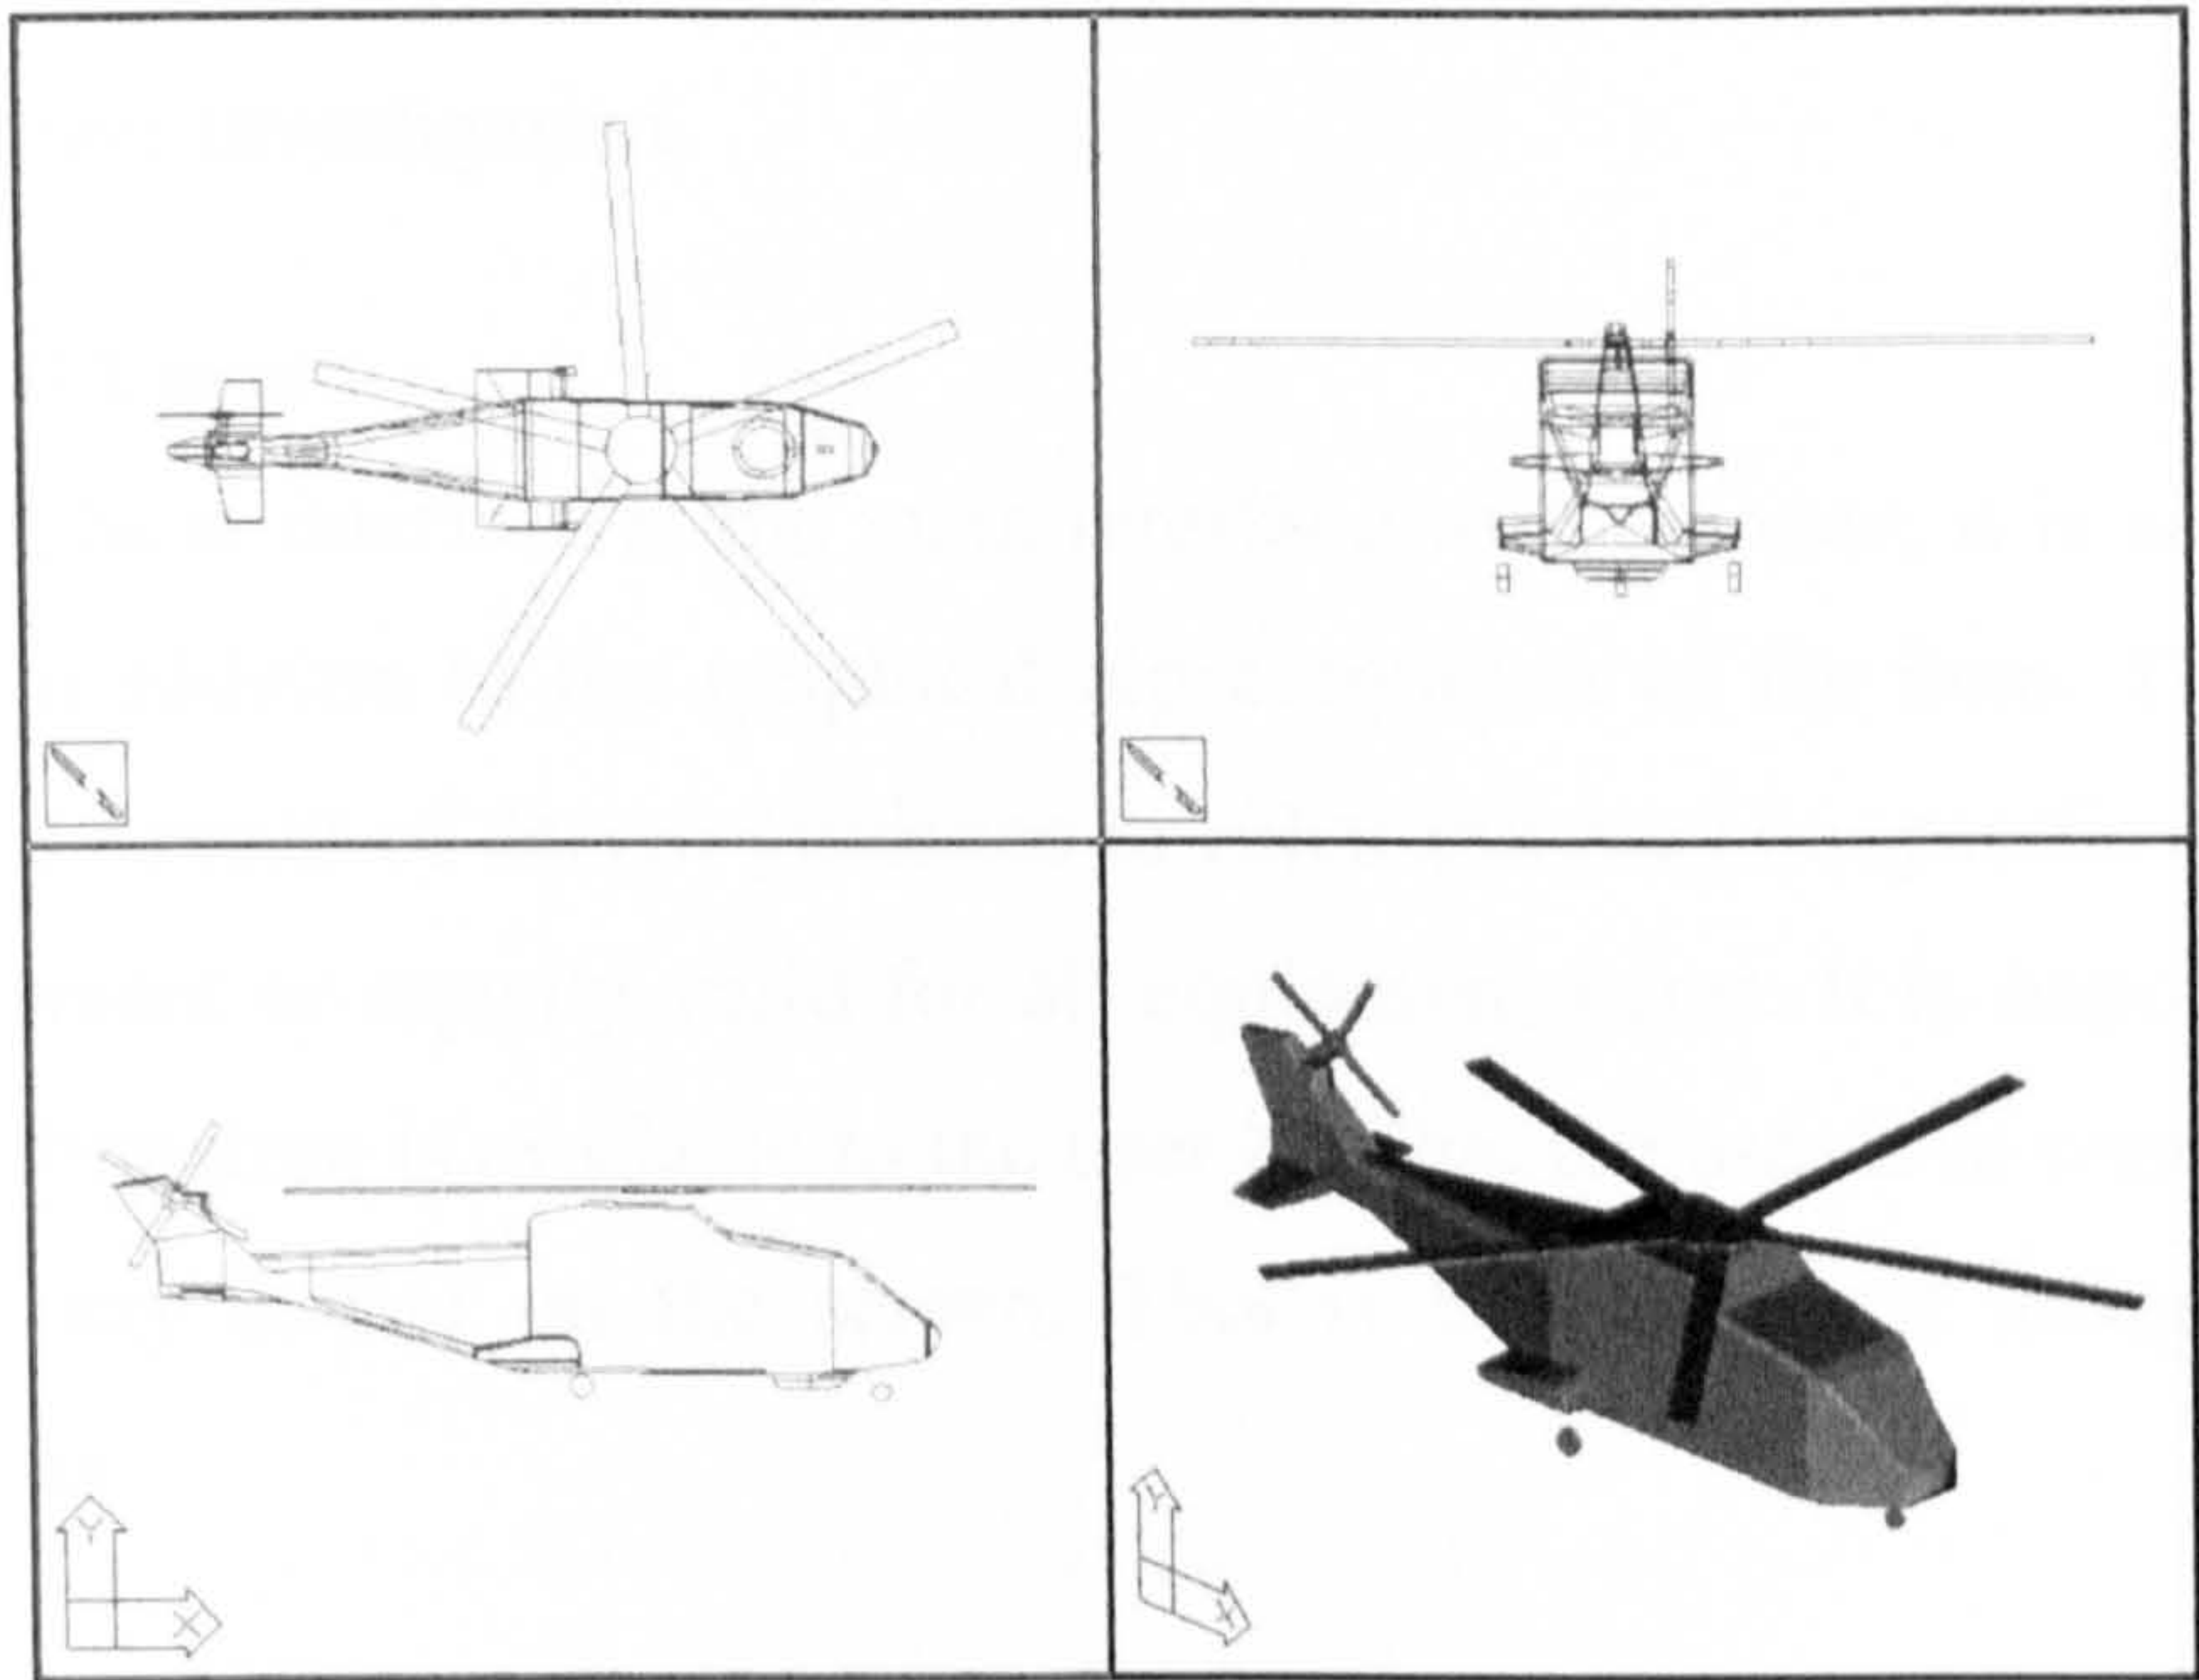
CAD System Showing Orthogonal Views and 3D Isometric View
